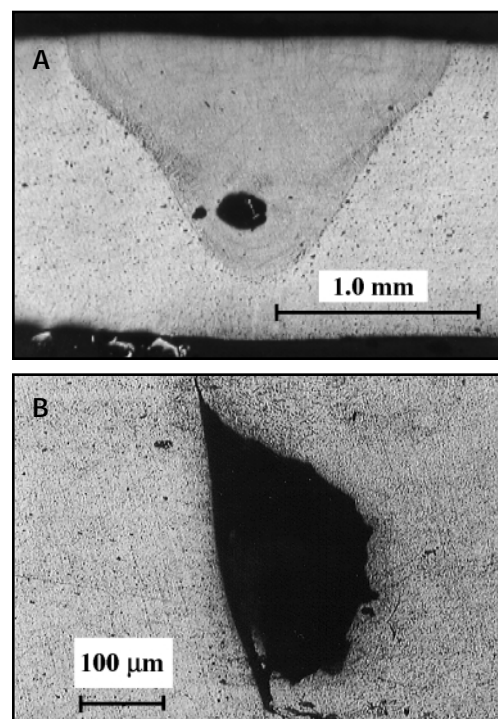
Cross sections of the welds of Alloy 5754 showing characteristic macroporosity produced by the instability of the keyhole. A — Spherical porosity; B — irregular-shaped porosity. Nominal power 3 kW, welding speed 150 in./min (63.5 mm/s) and shielding gas flow rate 200 in./min (5.66 m<sup>3</sup>/h) of helium.
